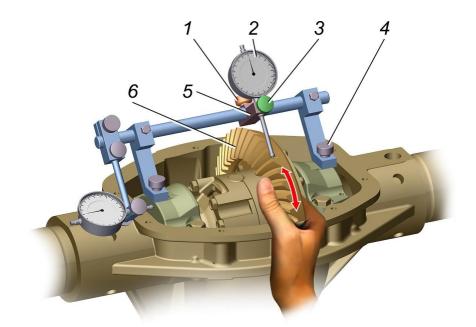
Final drive gears backlash check with indicator fixture: 1 – bracket tightening screw: 2 – indicator for checking the driving and driven gears backlash; 3 – indicator rod mounting screw: 4 – indicator bracket; 5 – mounting screw; 6 – driven gear
